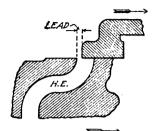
Section Showing Lead of Valve, Engine Running Over
